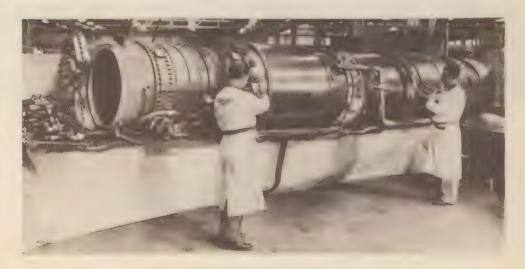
Mechanics adjusting a Westinghouse J40 turbojet engine.
